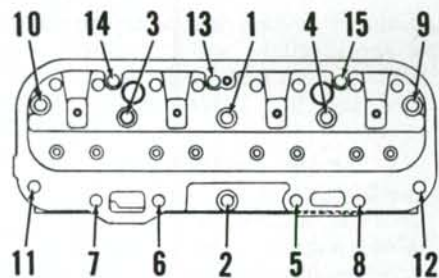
Tighten non-diesel cylinder head cap screws and stud nuts in sequence shown. Refer to text for torque specifications.
